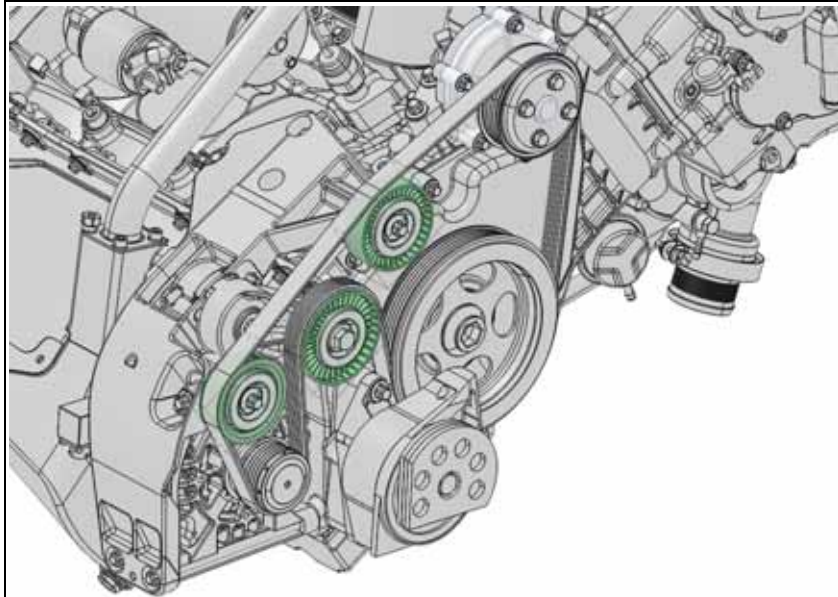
Inspecting the V-Ribbed Belt Pulleys
